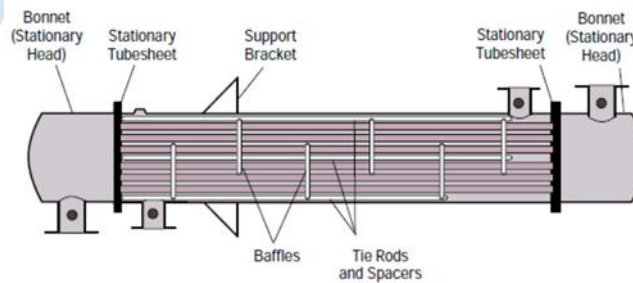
FIXED TUBE SHELL & TUBE HEAT EXCHANGER
